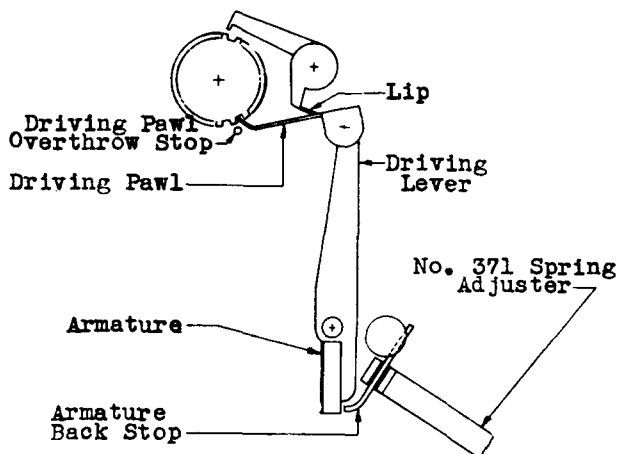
Method of Adjusting for Clearance Between Driving Pawl and Driving Pawl Overthrow Stop
